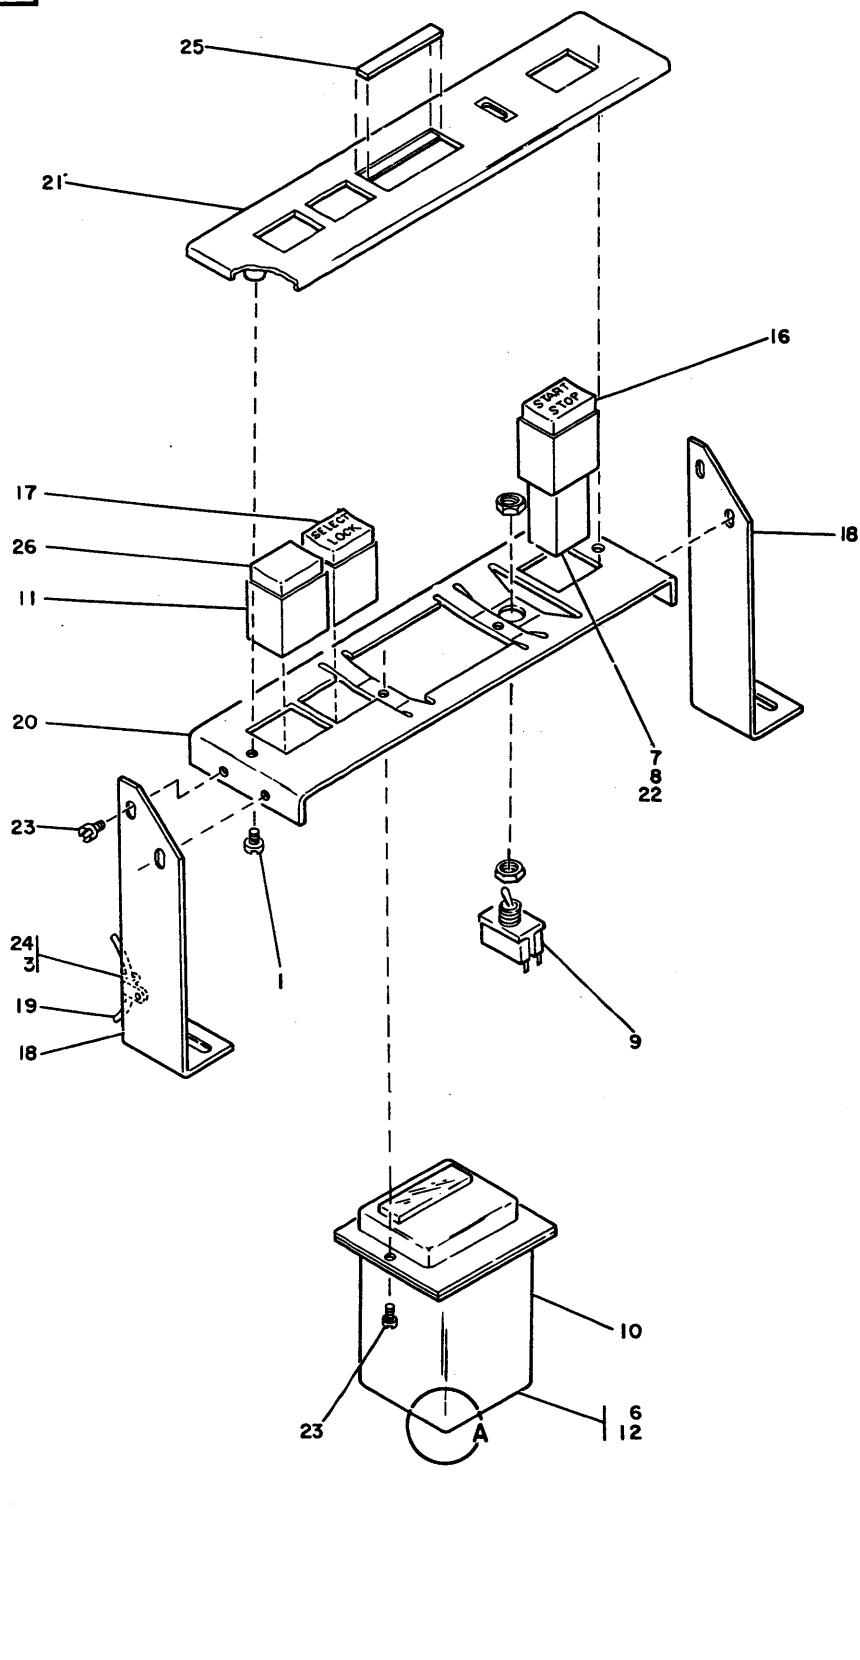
CONSOLE SWITCH ASSEMBLY. SEE LIST 4.
